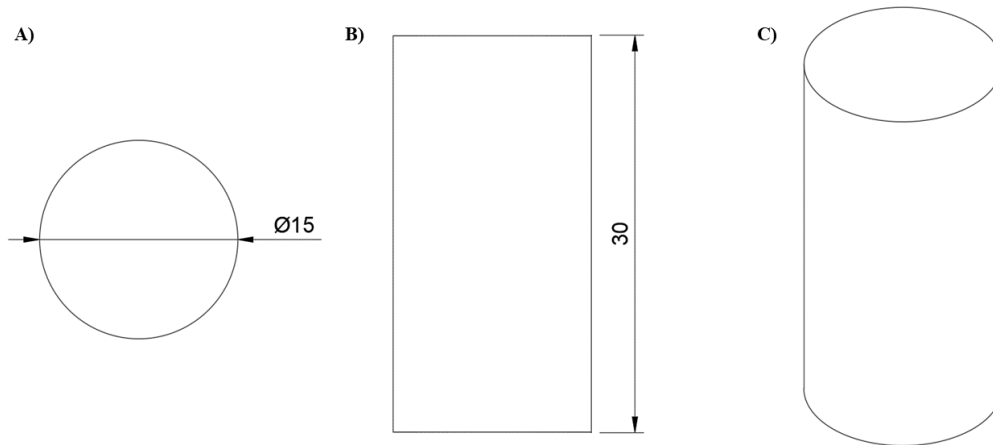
Solid cylinder. Top view (A), Side view (B) and Isometric view (C). Dimensions in mm.
